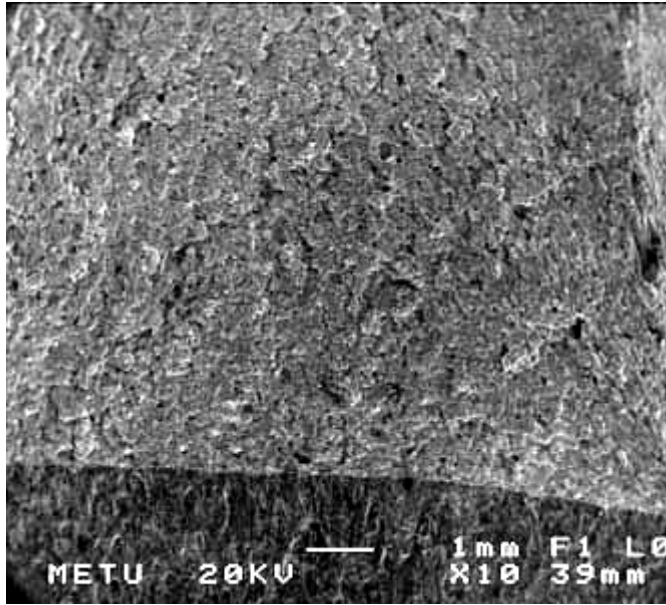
General view of fracture surface of 7050-T73651 alloy in LT orientation.
